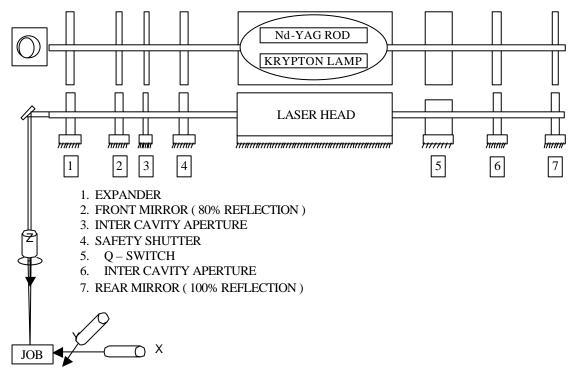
(a) Schematic Representation of CNC Nd-YAG Laser Machining System
